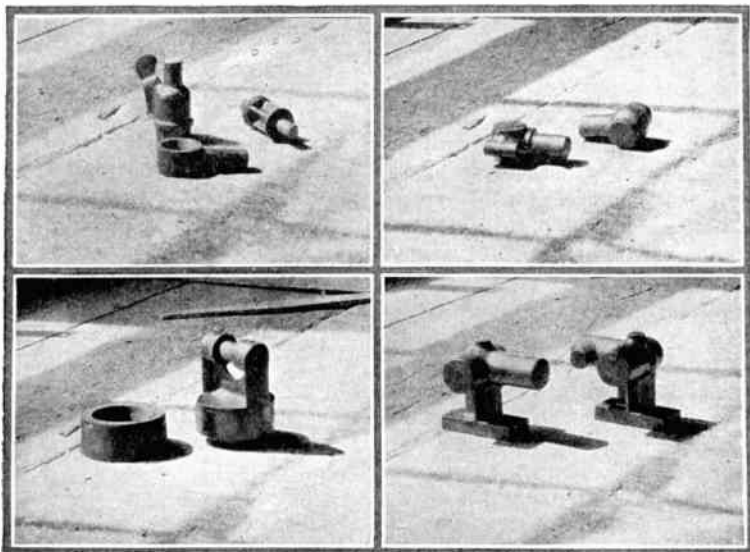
Bearing pedestals. Fig. 6. Piston and piston ring patterns. Fig. 7. Inlet and exhaust valves. Fig. 8. Connecting rod ends
